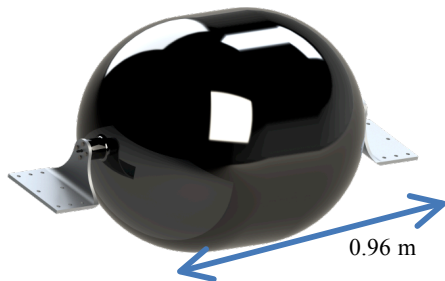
This is a rendered image of the Helium Backfill Tank Assembly.
